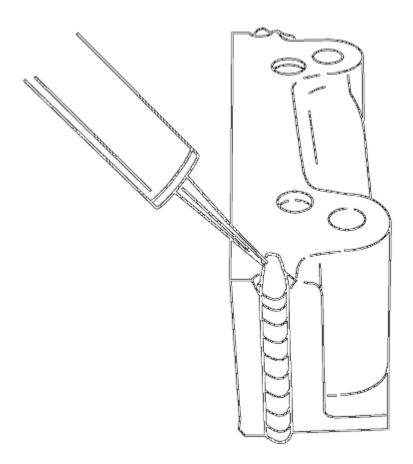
View Of Crankshaft Bearing Clip Courtesy of GENERAL MOTORS COMPANY
